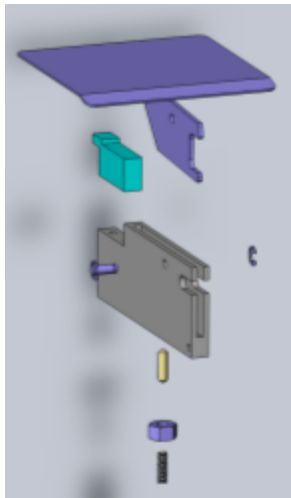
Exploded view of OEM Wide Flag Assembly
